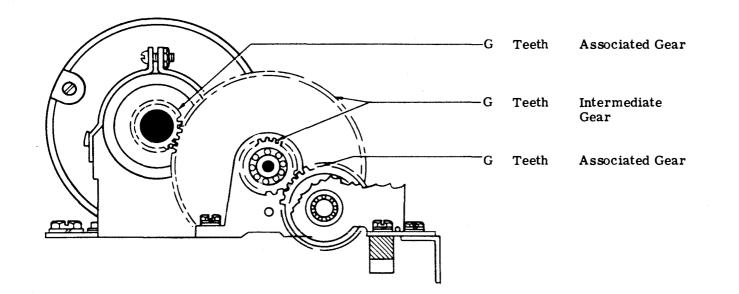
Intermediate Gear - Single Contact Single Mounting Bases
